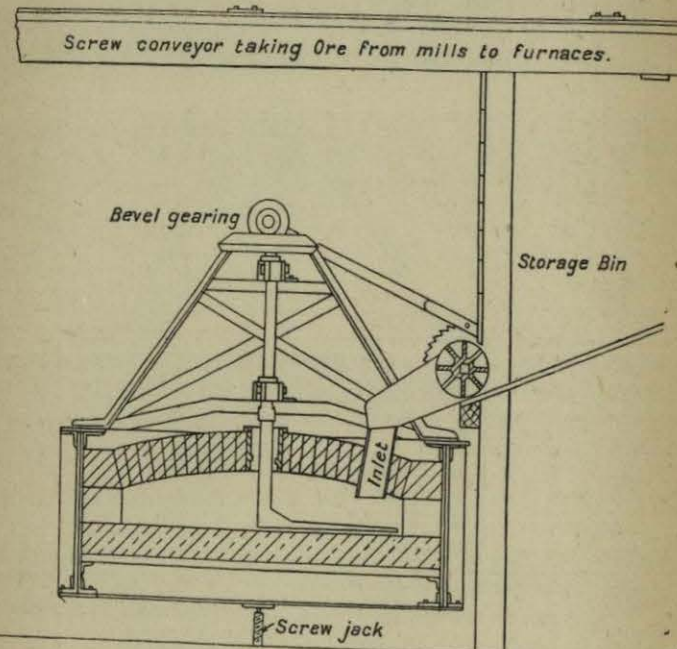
Section through Receiving End of Edwards Furnace showing Fluted Roll Feeding.
